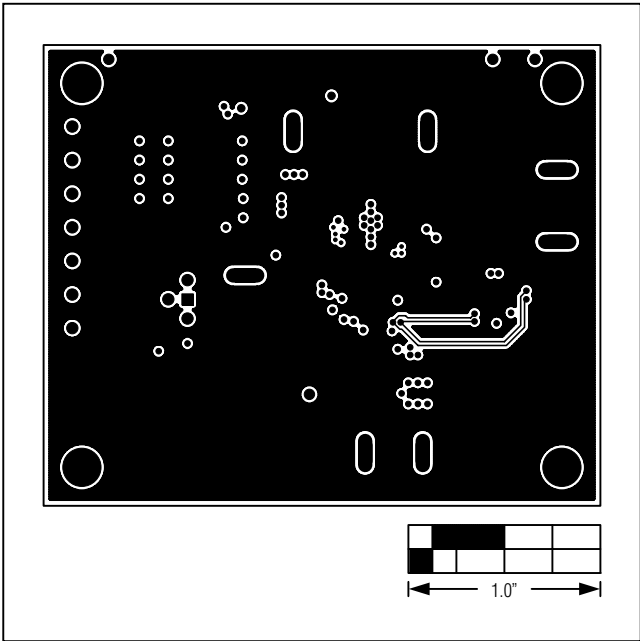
MAX17019 EV Kit PCB Layout—Layer 2
